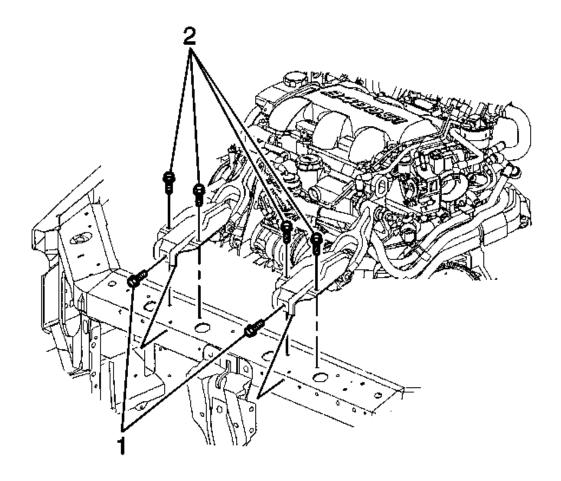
Installing Engine Mount Strut Bracket Courtesy of GENERAL MOTORS CORP.
